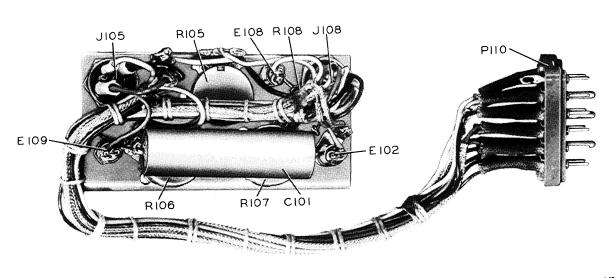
Transceiver 618S-1, Front Panel, Sidetone Control Assembly
